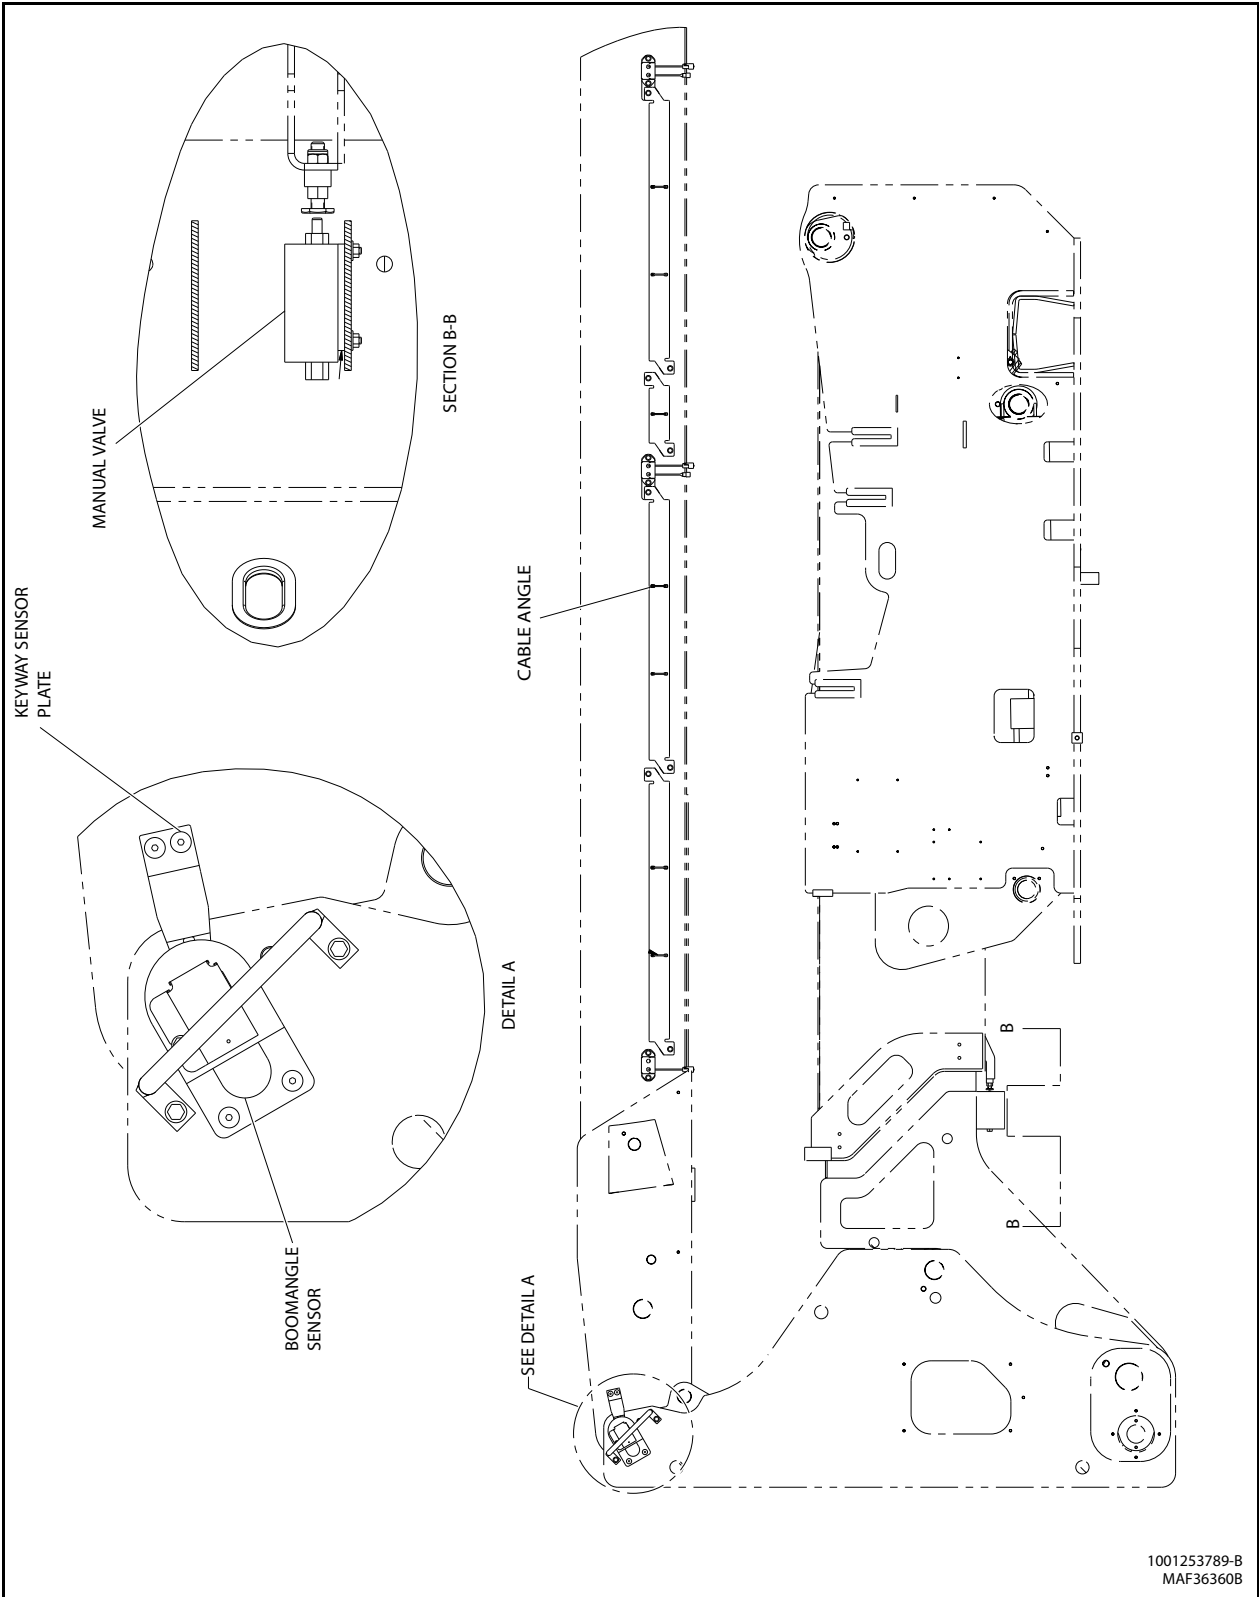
Capacity Switch Installation - Sheet 1 of 3
